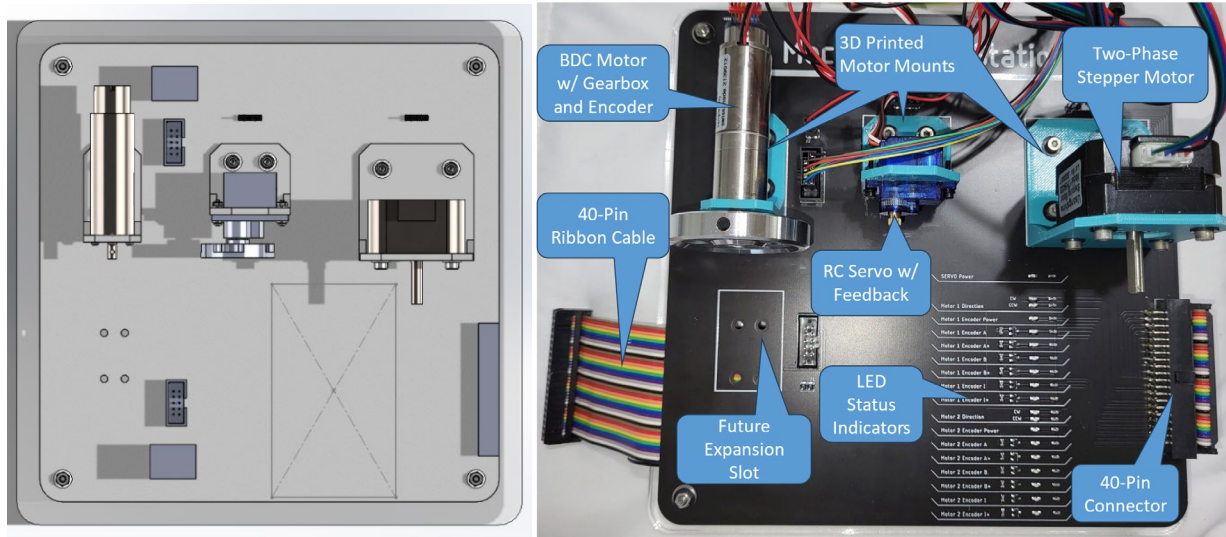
SolidWorks CAD assembly of the MAEP (left). Actual built test platform of the different motors and their mating connectors with 40-pin ribbon cable (right).
